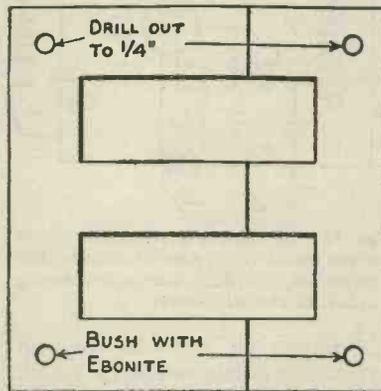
Illustrating how the holding bolts should be insulated from the core.
